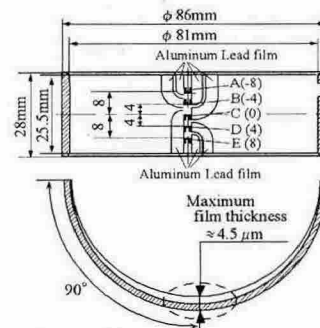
Thin-film pressure sensor on engine connecting rod bearing (Total 5 sensors)
